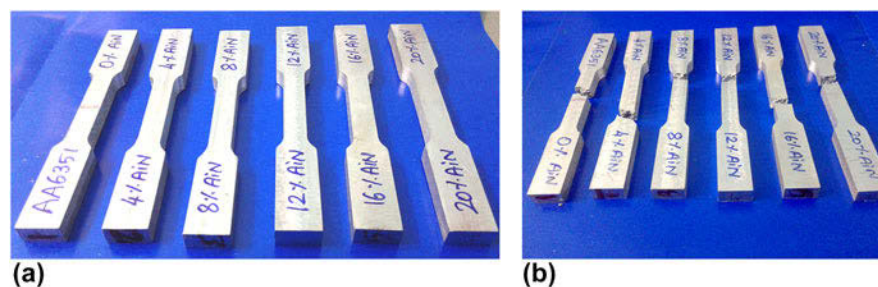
Photographs of tensile test specimens (a) before fracture (b) after fracture (ASTM E8).
